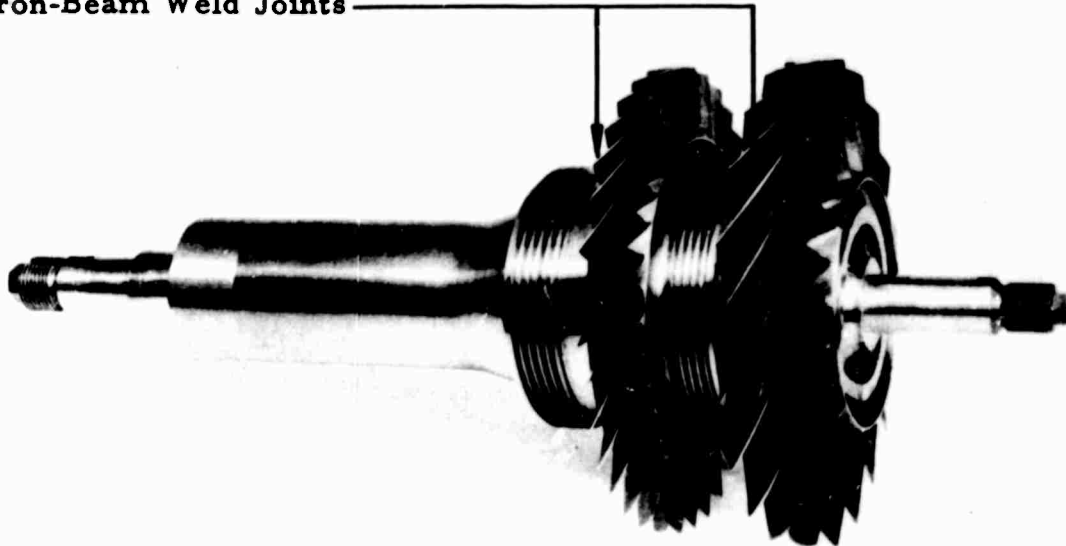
Rotor Assembly - Electron Beam Weldment.
